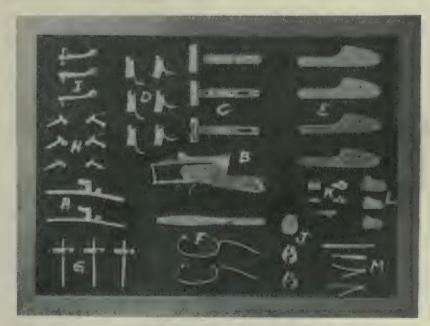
Component Parts of a Shotgun in Various Stages of Manufacture.
